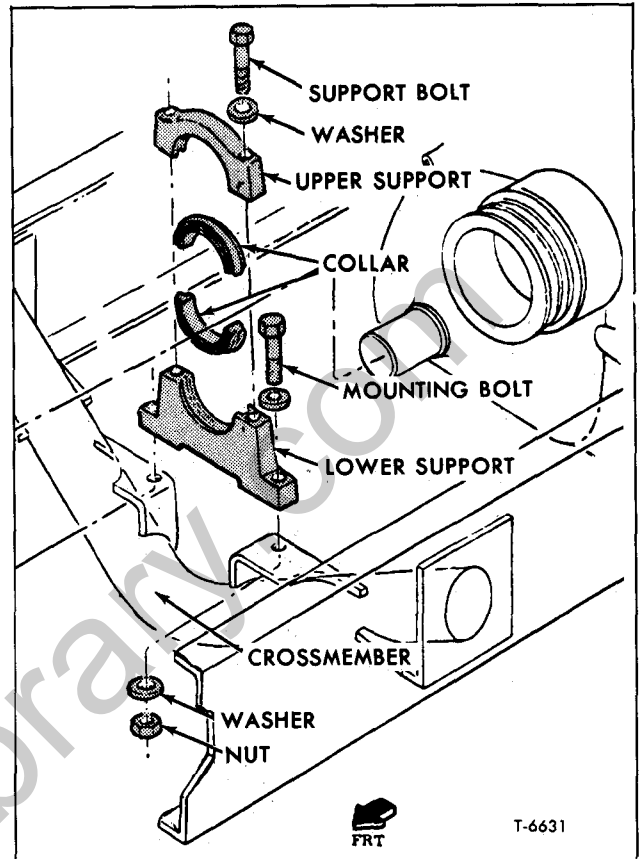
Engine Front Mounting Components on Alum. Tilt Series with Cummins Diesel Engine
